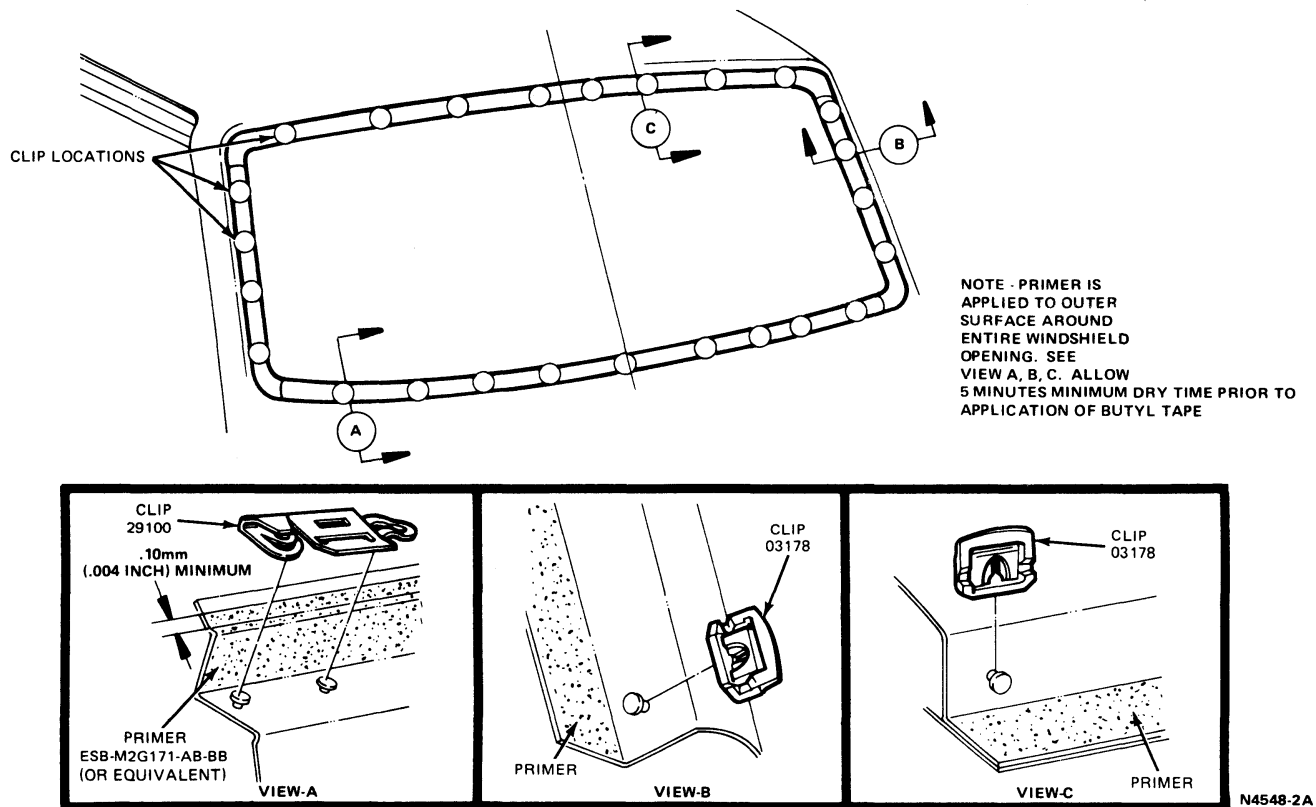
Windshield Sealers—F-100—F-350 and Bronco
